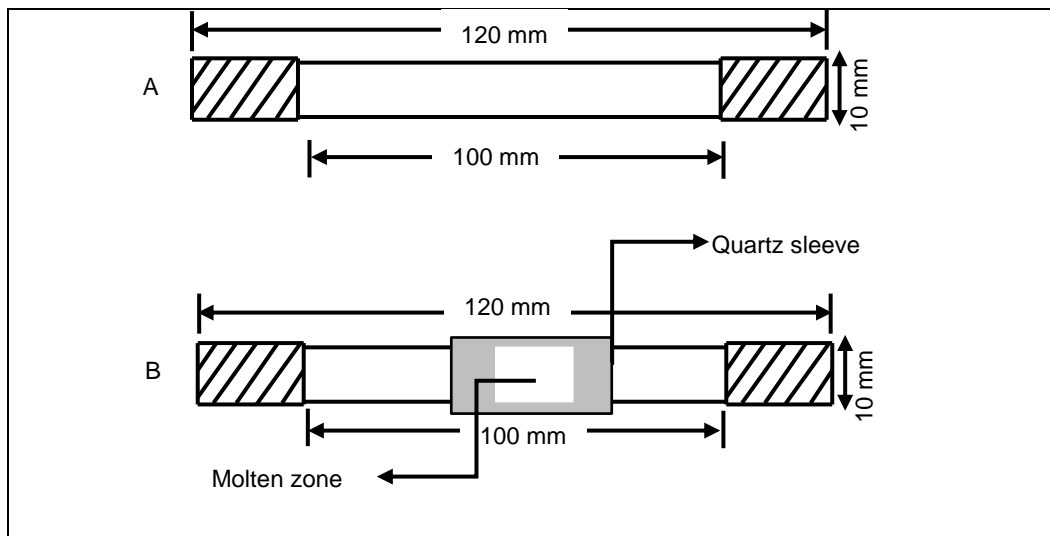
5: Schematic geometry of the Gleeble samples. Cylindrical hot tensile test specimen for (A) the solution treatment and (B) *in-situ* melting and solidification conditions.
